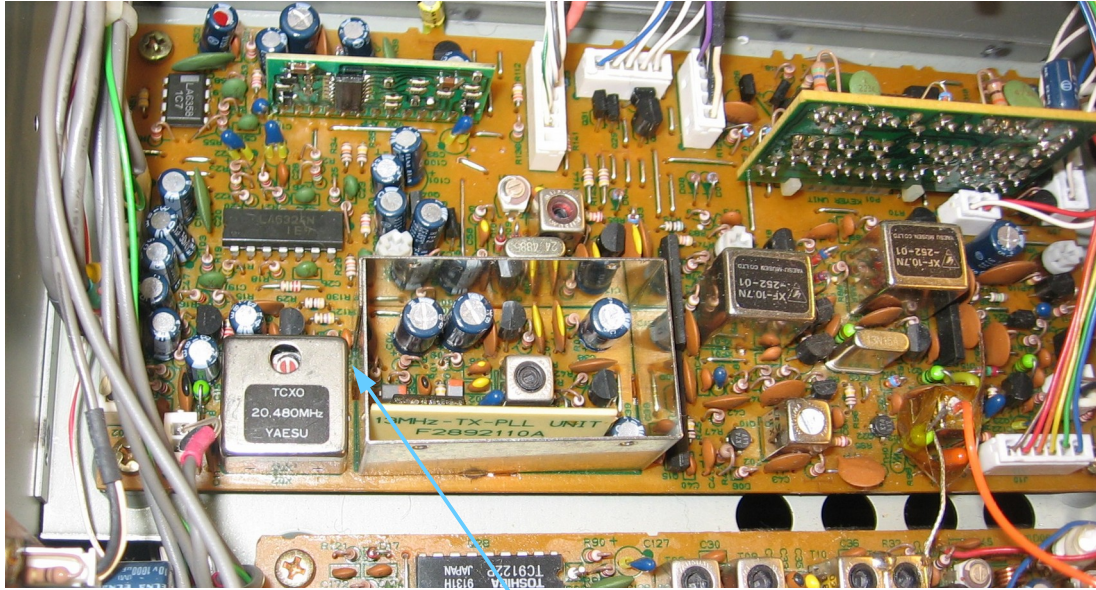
FT-736 board layout. You will have to remove the main 736 circuit board to make these modifications. Be careful, there are a lot of wires!
